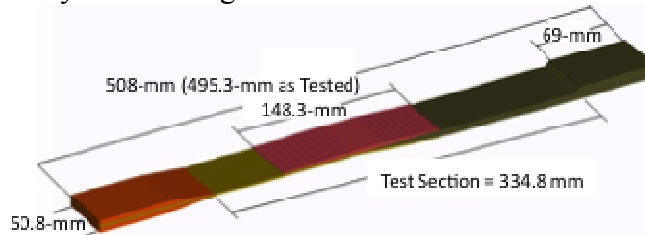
Specimen geometry. As built sample length was 12.7 mm shorter than drawing.
